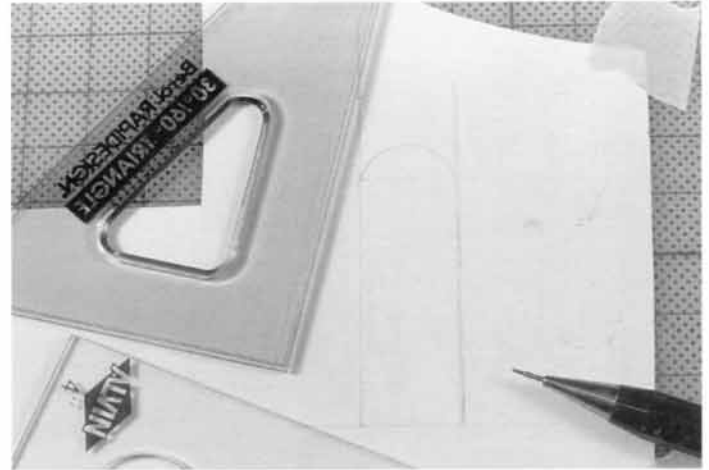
Draw the seat backing onto sheet stock. The length of the drawing should include seat back and bottom. The sheet stock should be no more than .010 inch in thickness.
